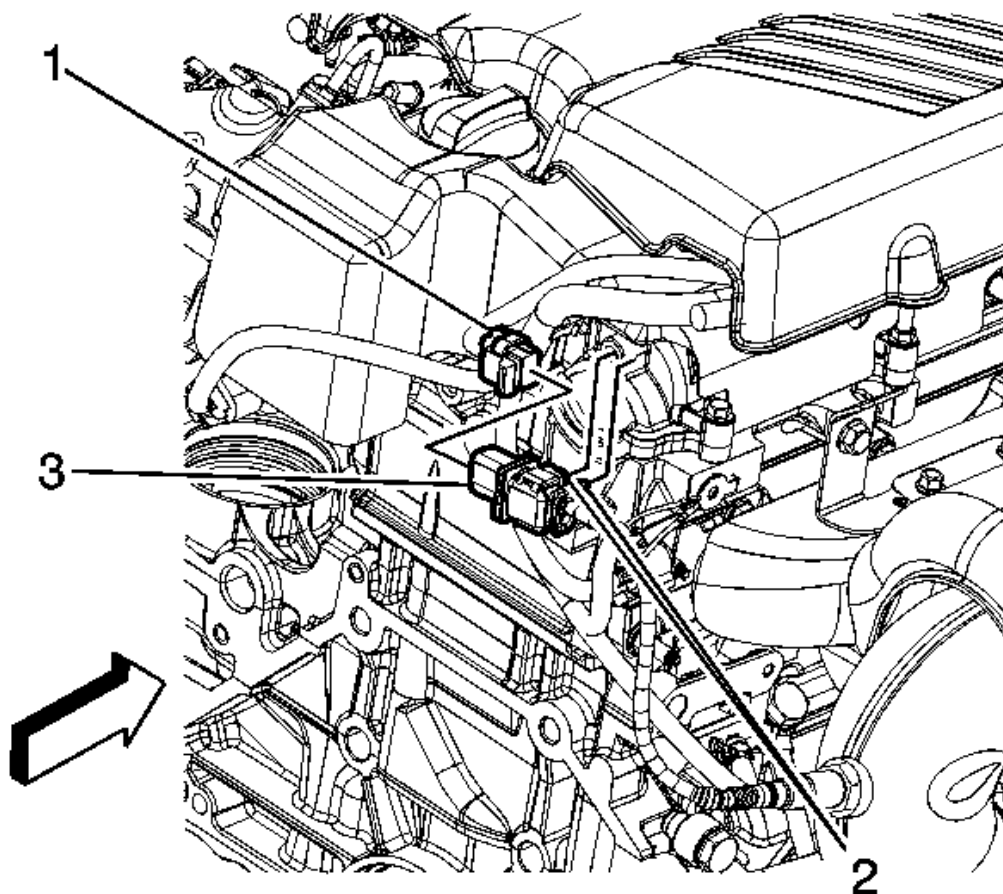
Identifying CPA Retainer & HO2S Connector & Clip
